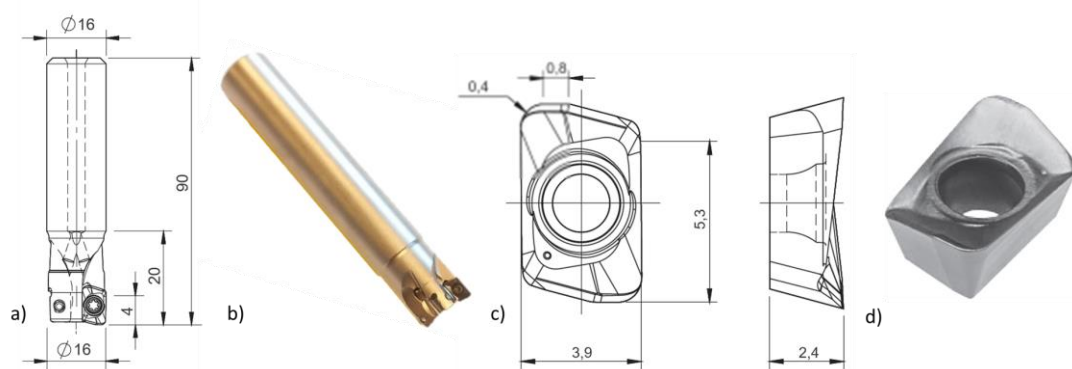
a) and b) Milling shank geometry and dimensions, c) and d) cutting insert geometry and dimensions.
